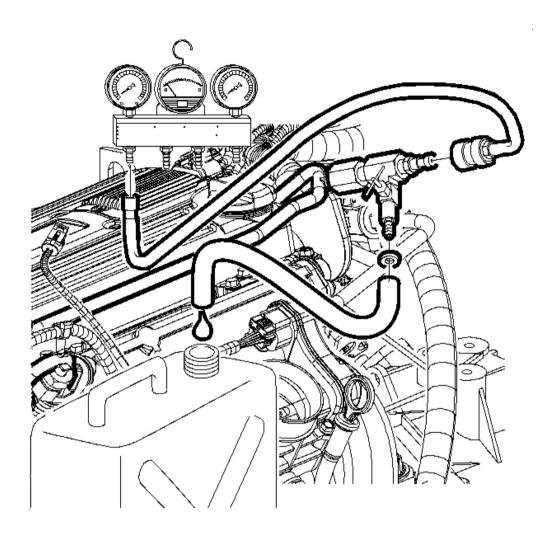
View Of Fuel Tank Drain Hose Courtesy of GENERAL MOTORS CORP.
